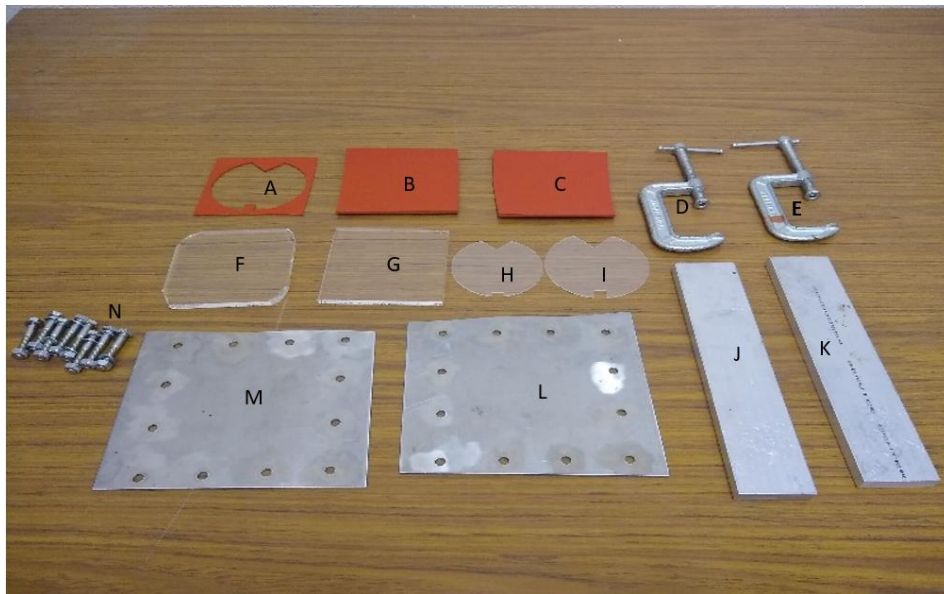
Part A- Silicon rubber for Positioning. Part B & C- Silicone rubbers for force distribution. Part D & E- Aluminum clamps. Part F & G- Glass plate. Part H and I- acrylic cutouts Part M & L- Steel plates. Part J & K- Aluminum bars. Part N-Nuts and bolts
